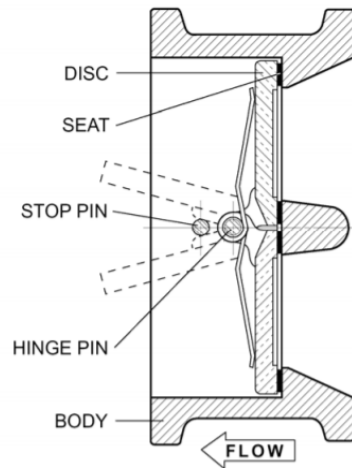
Dual plate check valve from [Hardhatengineer.com](https://hardhatengineer.com/)
